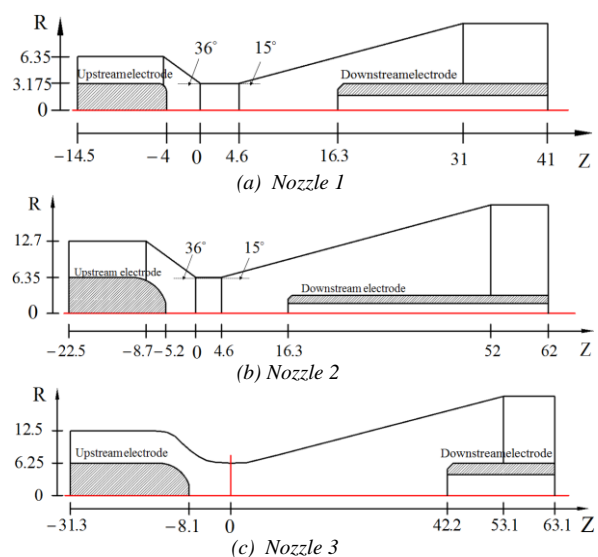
Nozzle geometries. Unit of nozzle dimensions: mm.
